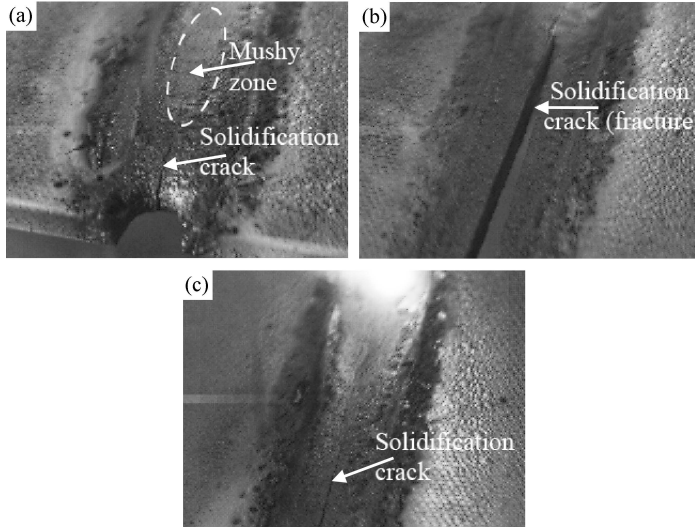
High-speed camera images showing solidification cracking during welding. (a) Solidification crack initiating at the trailing edge of the mushy zone (5 mm case), (b) full fracture observed (5 mm case) and (c) the solidification crack stops propagating further (7 mm case). The weld bead size is 2.5 mm.
